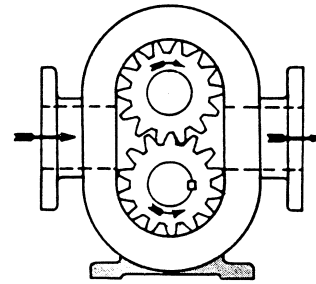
Gear pump (courtesy of the Hydraulic Institute)
